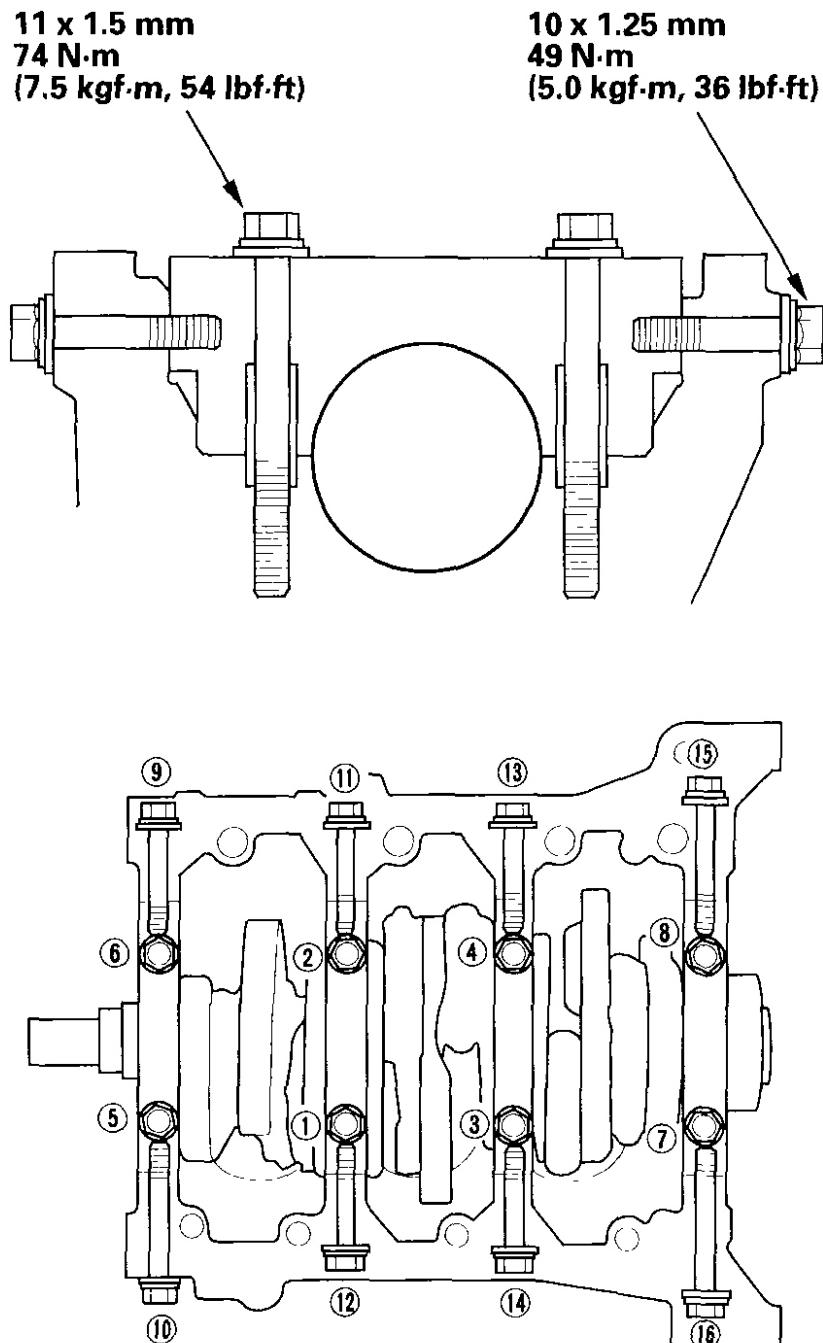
Tightening Bearing Cap Bolts With Torque Specifications
